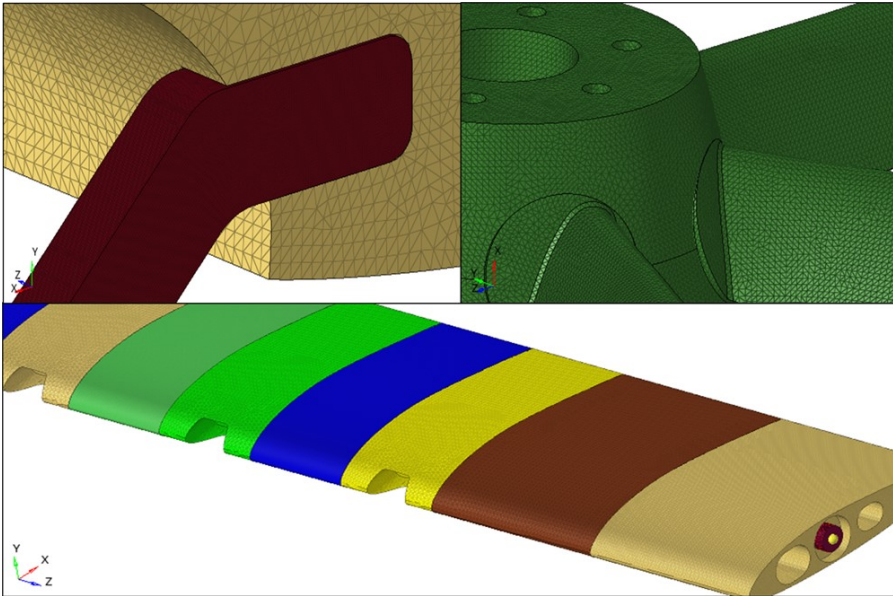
Representation of the meshed models for the three analysis. Top left, bracket-wing assembly; top right, propeller; bottom, wing assembly.
